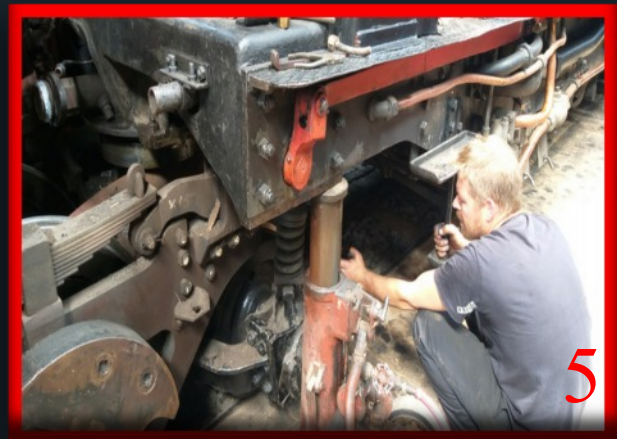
Number 153 rear unit ready to be moved back under 153 boiler.
